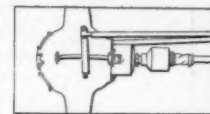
Enlargement of the live rear axle showing a universal joint at the extremity of the propeller shaft
